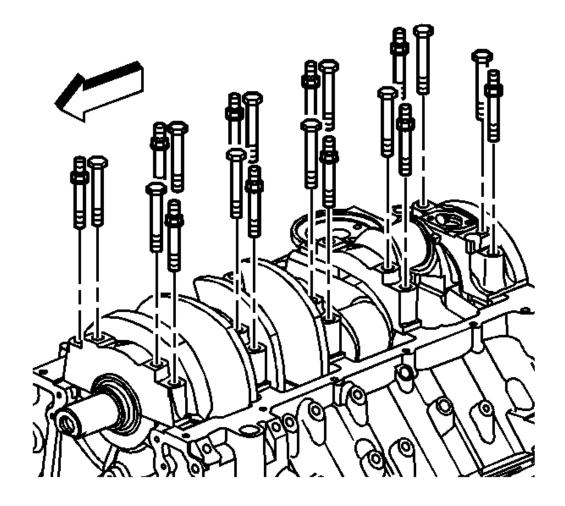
View Of Crankshaft Bearing Cap Bolts & Studs Courtesy of GENERAL MOTORS CORP.
